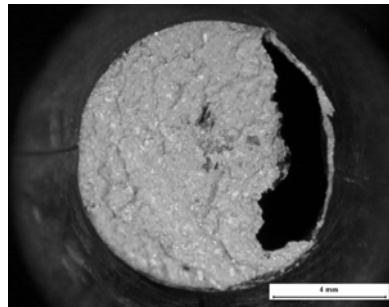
Porosity and internal oxidation encountered in some investment-casting test parts after fracture (TIFA).
